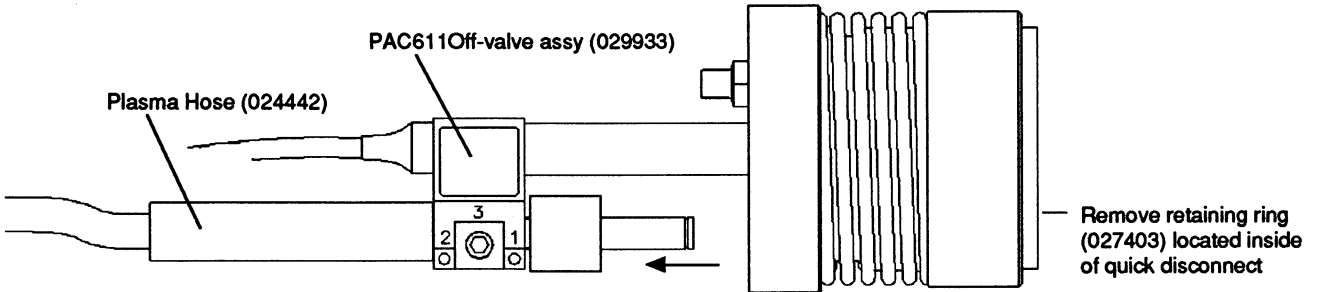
Removing Off-valve Assembly and Plasma Hose from Quick Disconnect Assembly
